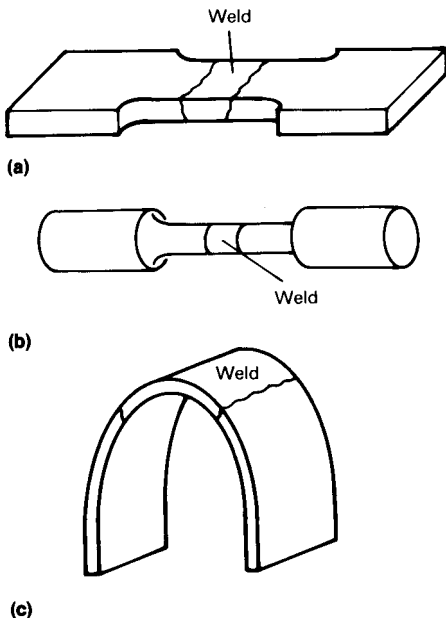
Tension and bend specimens for testing of full-penetration groove welds. (a) Reduced-section tension specimen. (b) Round tension specimen. (c) Bend specimen
